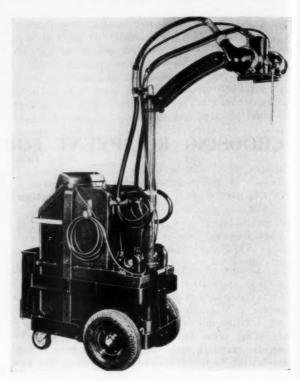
This unit (150 kv portable x-ray type) is well adapted for use in a shop or on location to radiograph welds in steel plate up to 1 in. thick. The cooling system is self-contained and the unit will operate wherever a 220-volt power source is available.
